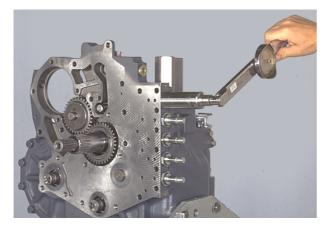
Tighten cartridges to specified torque. See assembly instruction drawing.
